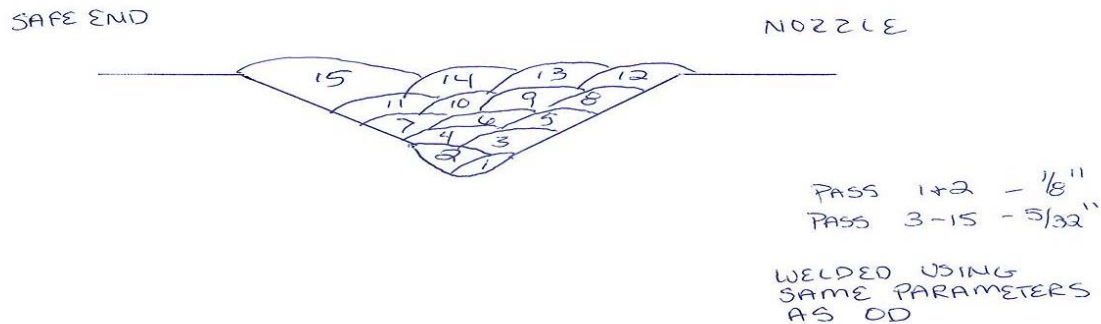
Weld Bead Map of the WOM Safe End Back Weld
